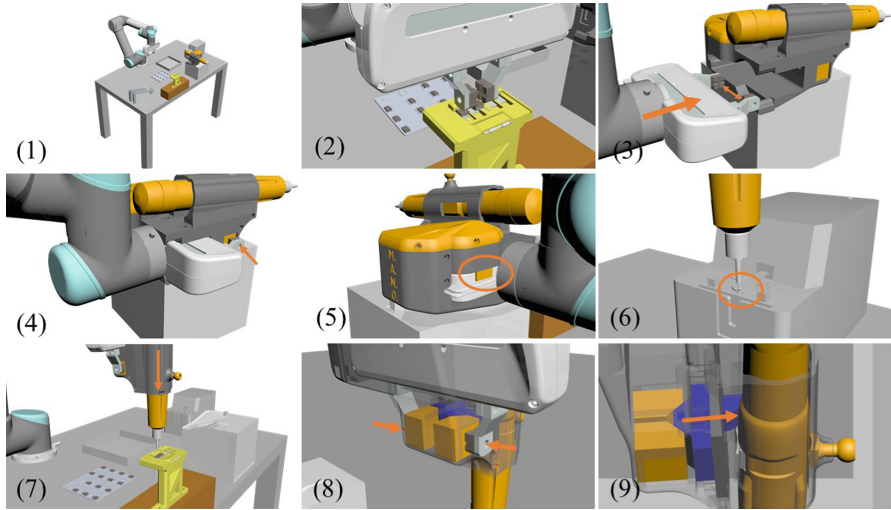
(1) Full view of work table with cobot and latest holder prototype, (2) Pick & place function of the robot, (3) Screwdriver holder, (4) Holder fixation, (5) Holder locking, (6) Pick screw, (7) Positioning, (8) Screwdriver actuation, (9) Inside view of screwdriver actuation.
